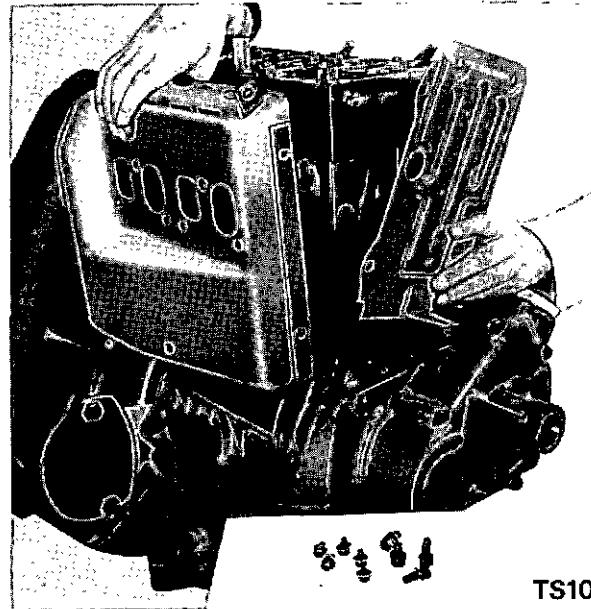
Removing Gear End Air Shield and Air Cowling.
